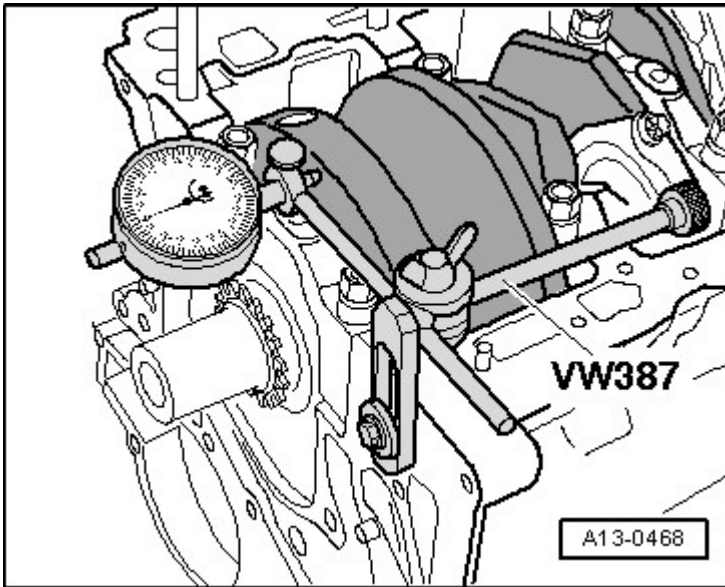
Identifying Dial Indicator Attached Together With VW387 Dial Gauge Holder To Cylinder Block
